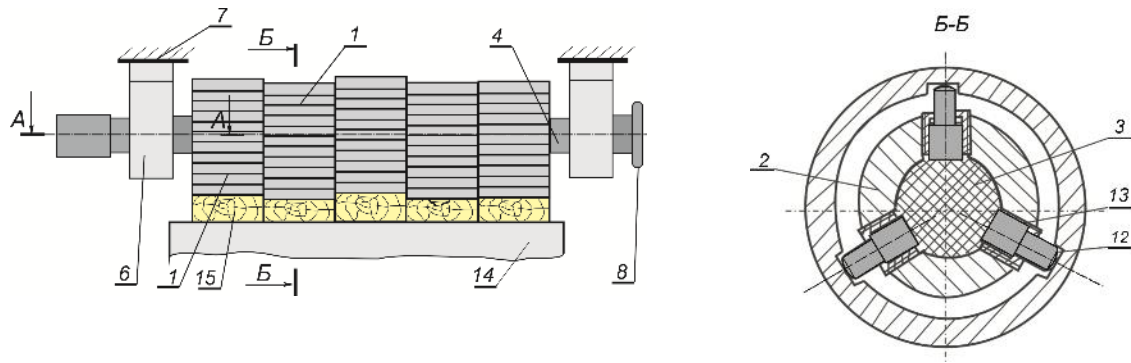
Sectional roller with hydroplastic: 1 – grooved section; 2 – roller shaft; 3 – axial hydro cavity; 4 – trunnion; 5 – bearing; 6 – bearing housing; 7 – planer machine frame; 8 – drive sprocket; 9 – rod; 10 – spring; 11 – adjusting nut; 12 – plunger; 13 – bushing; 14 – planer machine table; 15 – workpiece.
